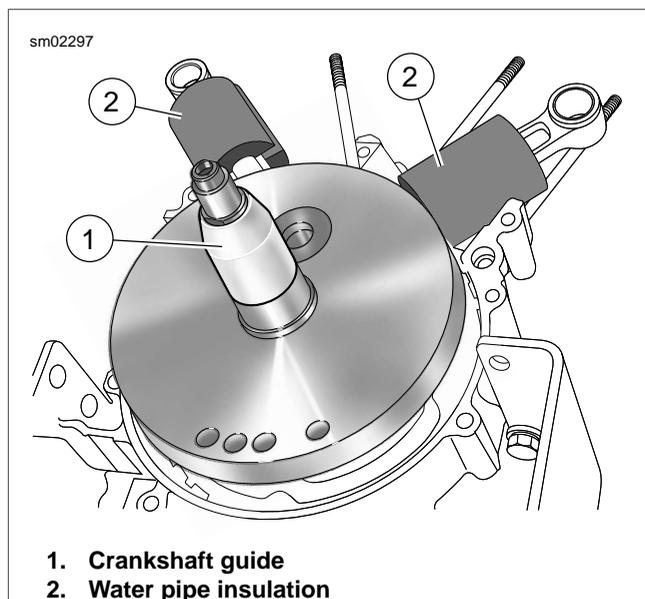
Crankshaft Guide (Part No. HD-42326-A)
